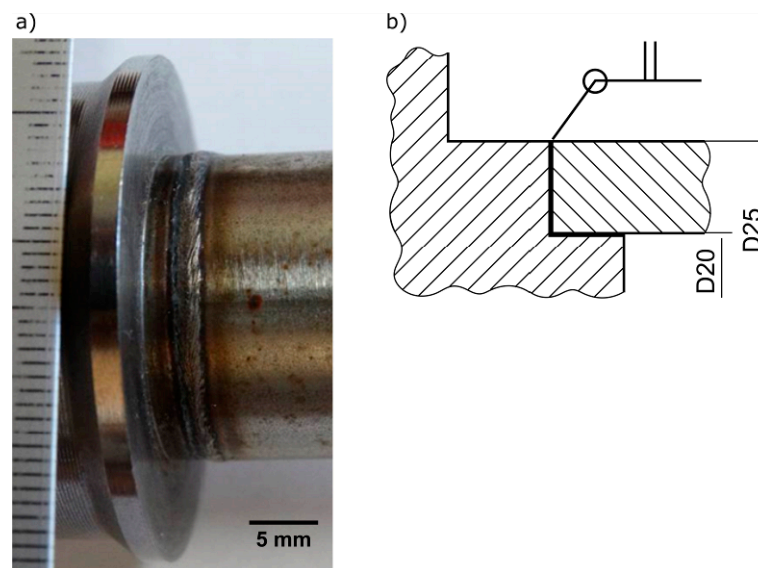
The welded joint: (a) general view, (b) design.
